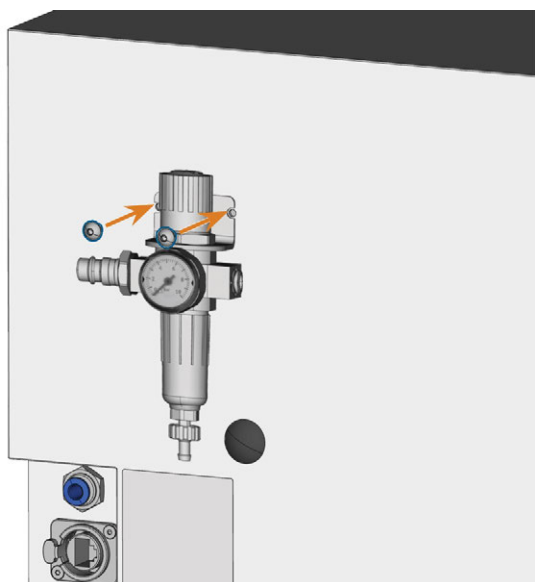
MOUNTING THE COMPRESSED AIR REGULATOR
